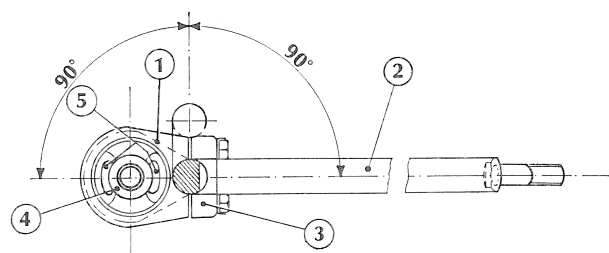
2/12 - Aligning the Stabilizer Bar and the Front Mounting Support
